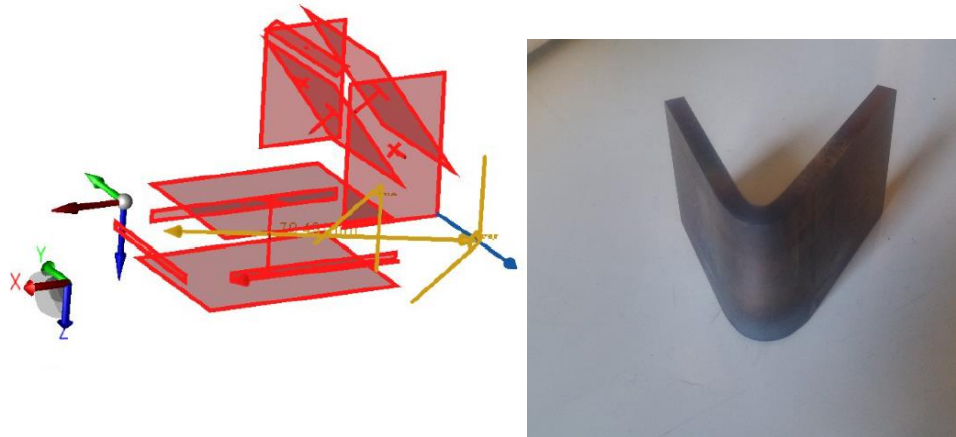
Illustration of Formed Workpieces Measured by CMM and Bent Workpieces After Locally Heating.
